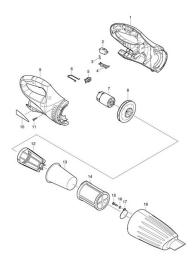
LEV System in Exploded View Spare Parts Model 10.8V LXT Cordless Air blower.
